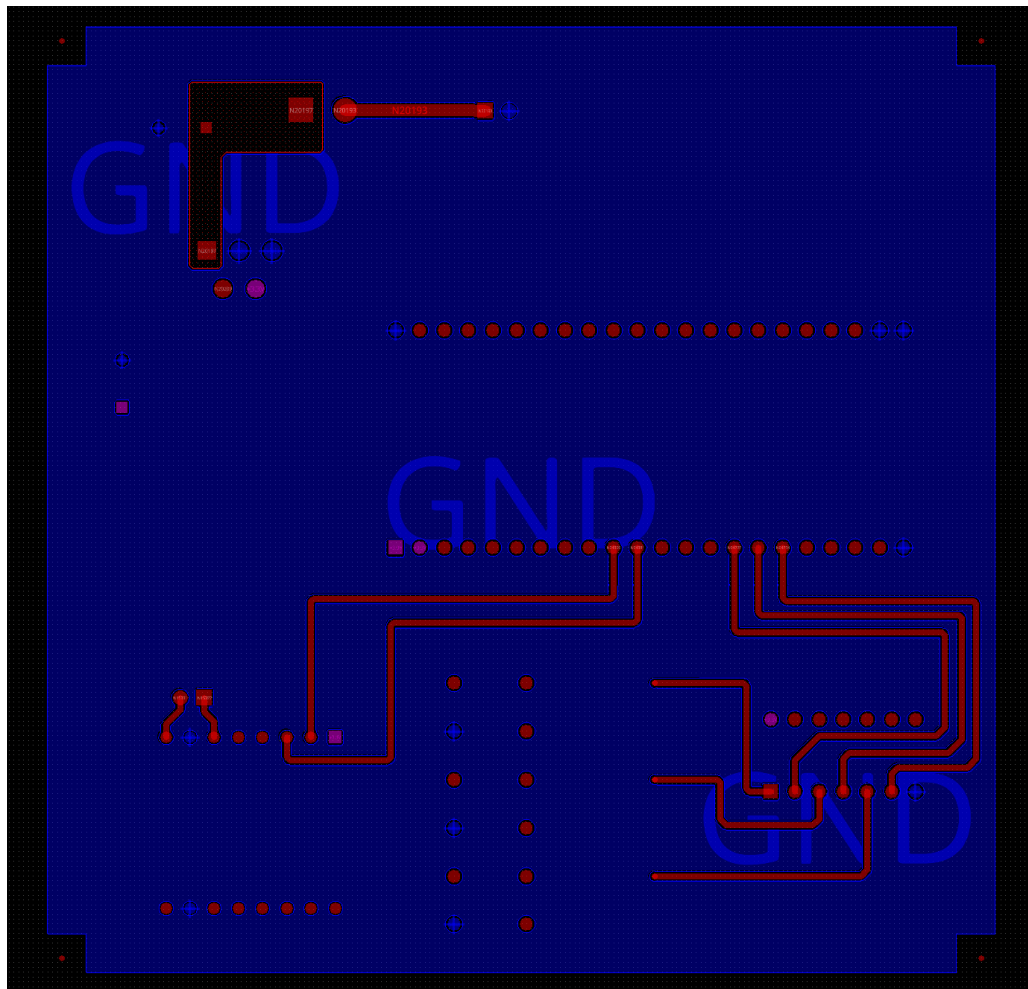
d: First Prototype Layout Bottom Layer
